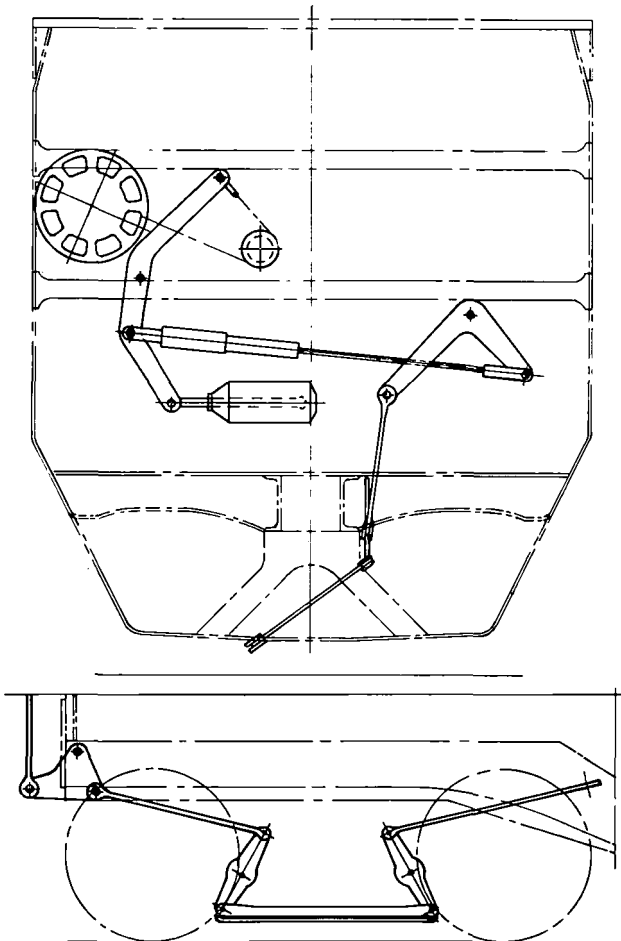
CAR-MOUNTED BRAKE CONFIGURATION
